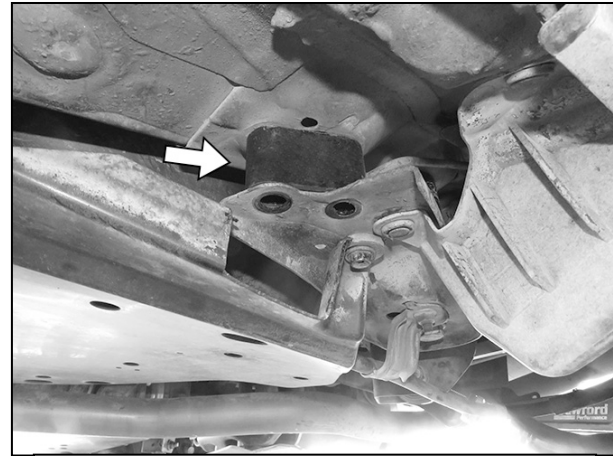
Models without suspension lift "spacer," reuse factory hex bolts to attach rear Frame Mounting Bracket
